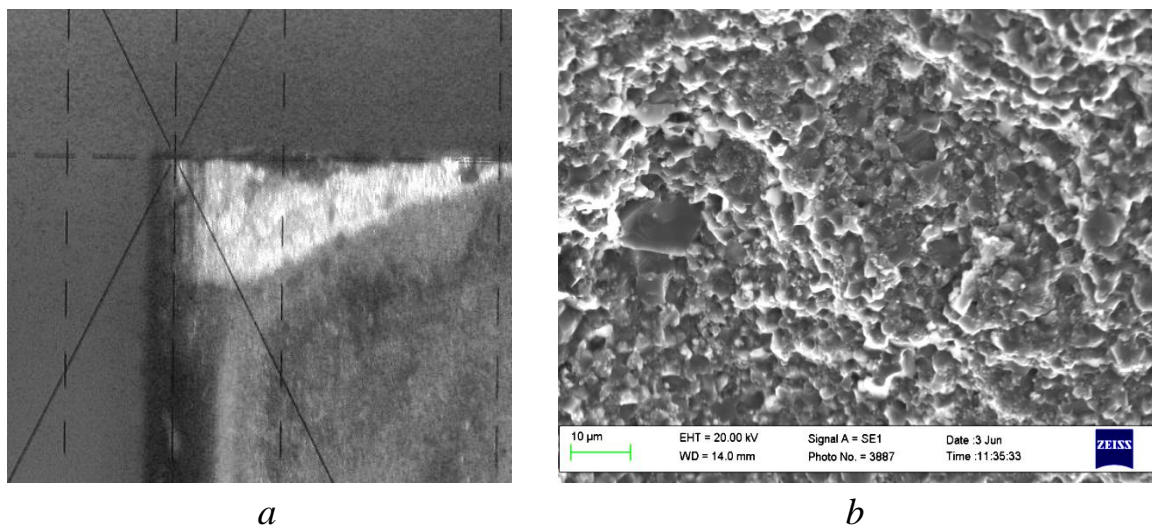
Cutting edge (*a*) and fracture pattern (*b*) of the cutting plate of As15-6 composite
